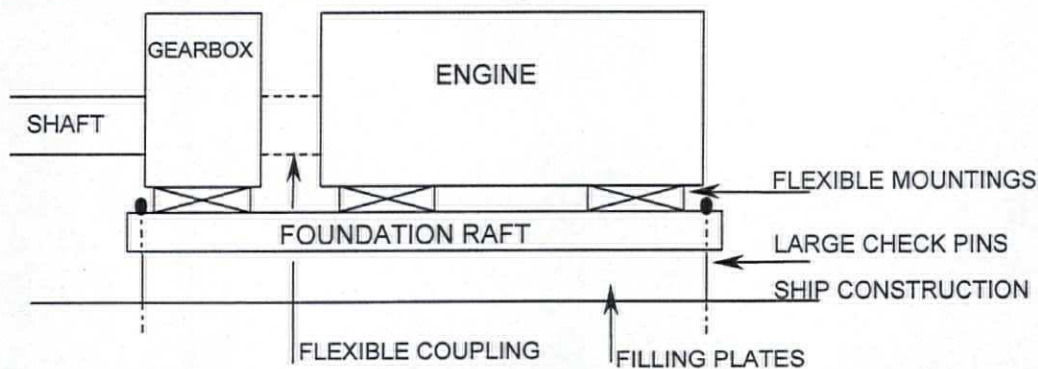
Example of a mounting system where engine and gearbox are mounted together
